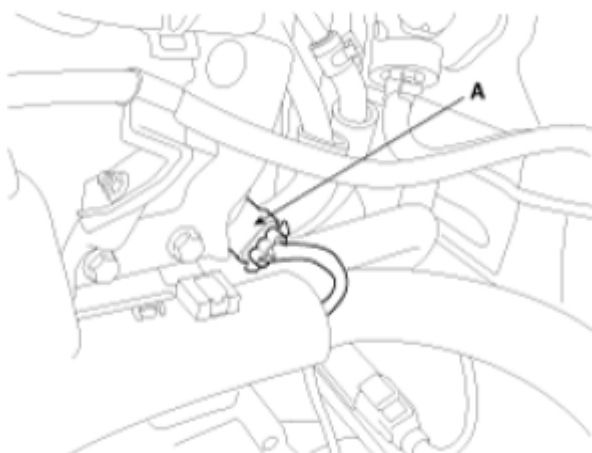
Identifying Bank 1 CMP Sensor Connector
